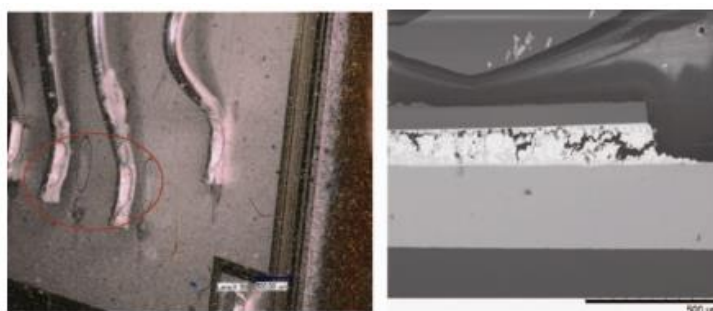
Bonding wire lift-off and solder fracture after fatigue [42].
